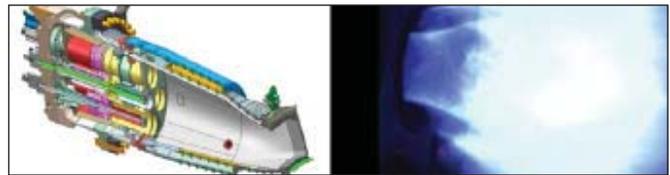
7HA GT combustor (left) and flame image from combustion laboratory testing (right)
